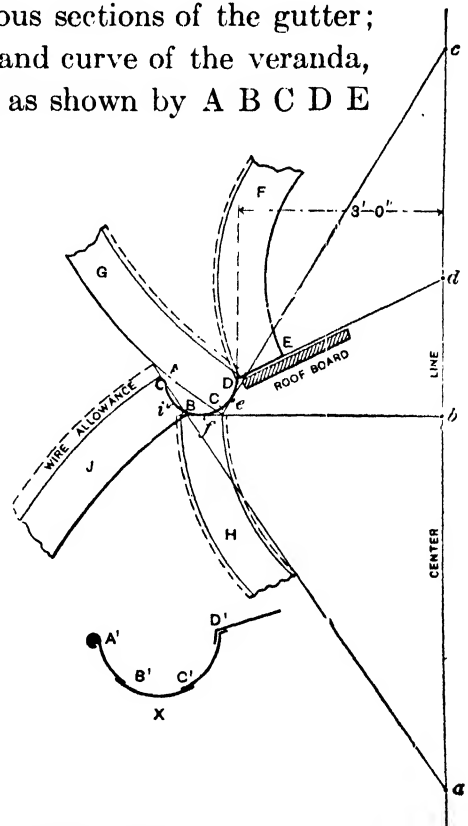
Gutter Around a Circular Corner. Obtaining the Blanks
